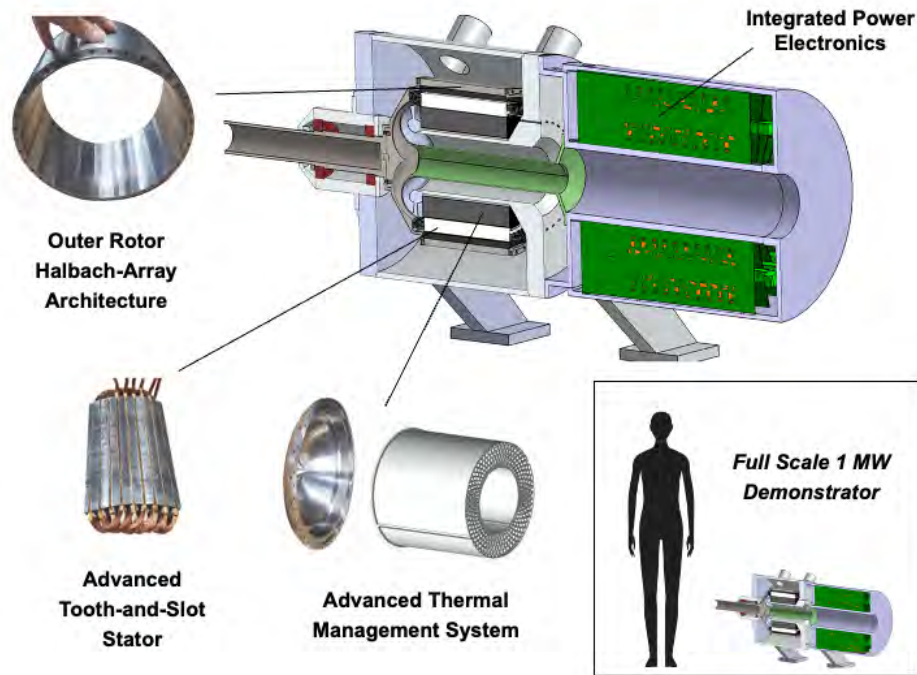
Full scale 1 MW motor drive demonstrator with focus on key enabling technologies: a high-speed Halbach-array outer rotor, a low loss tooth-and-slot stator, a load-bearing heat sink, and closely coupled high-performance power electronics.
